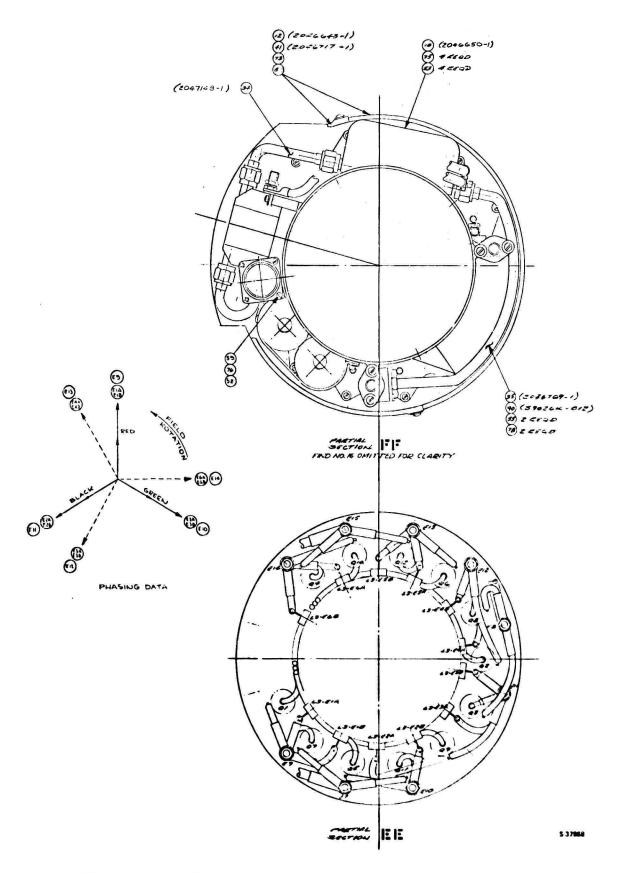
270 VDC Generator Assembly, PN 518989-1 (Sheet 3)
